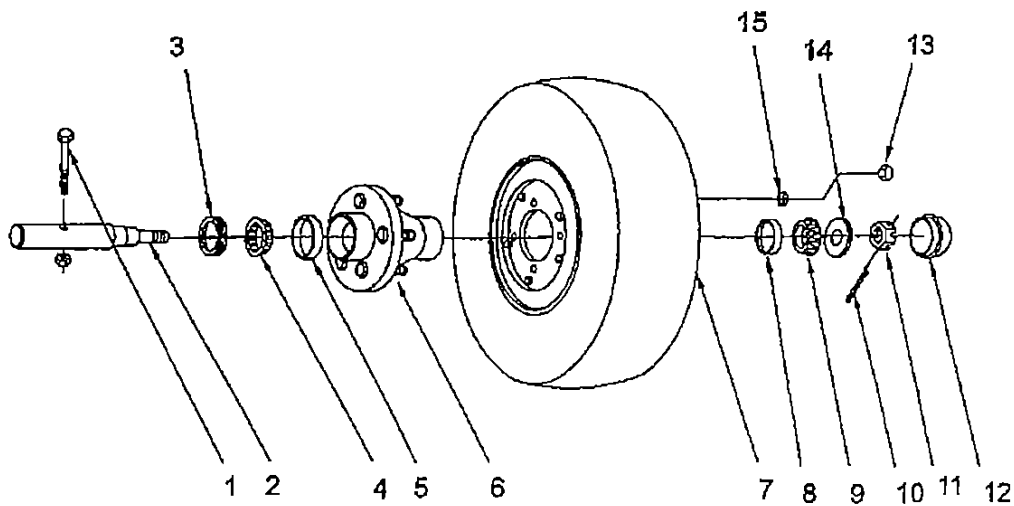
LAMINATED WHEEL COMPONENTS
